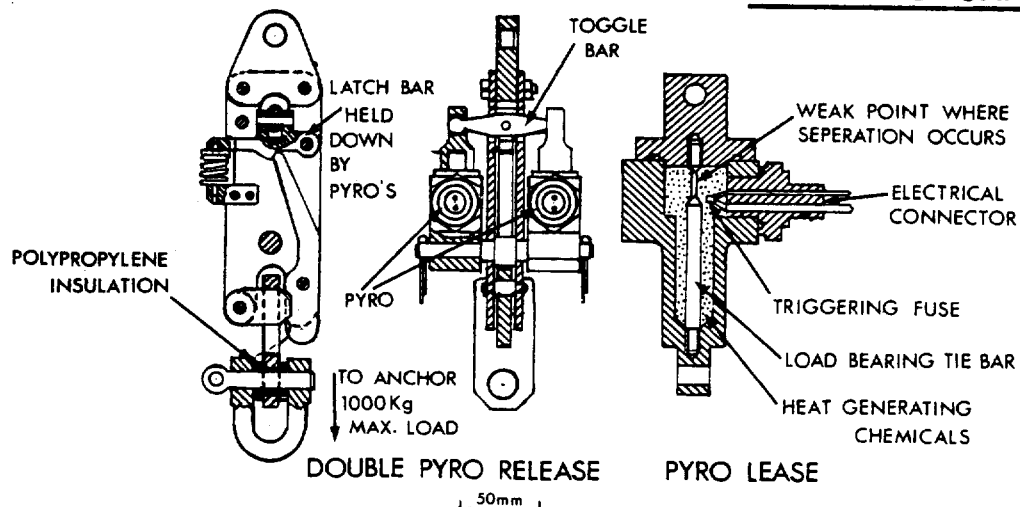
PYRO RELEASE ASSEMBLY, ILLUSTRATING A PYRO TECHNIC DEVICE AND THE USE OF LEVERS TO ENABLE CONTROL OF A HEAVY LOAD BY A WEAK DEVICE.
